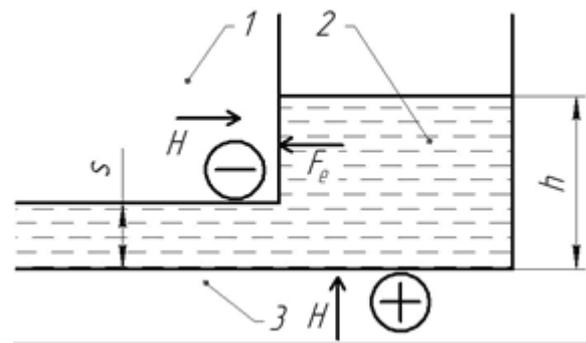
The forces acting on the workpiece on the machine table: 1 – workpiece; 2 – rheological ferromagnetic liquid; 3 – machine table
